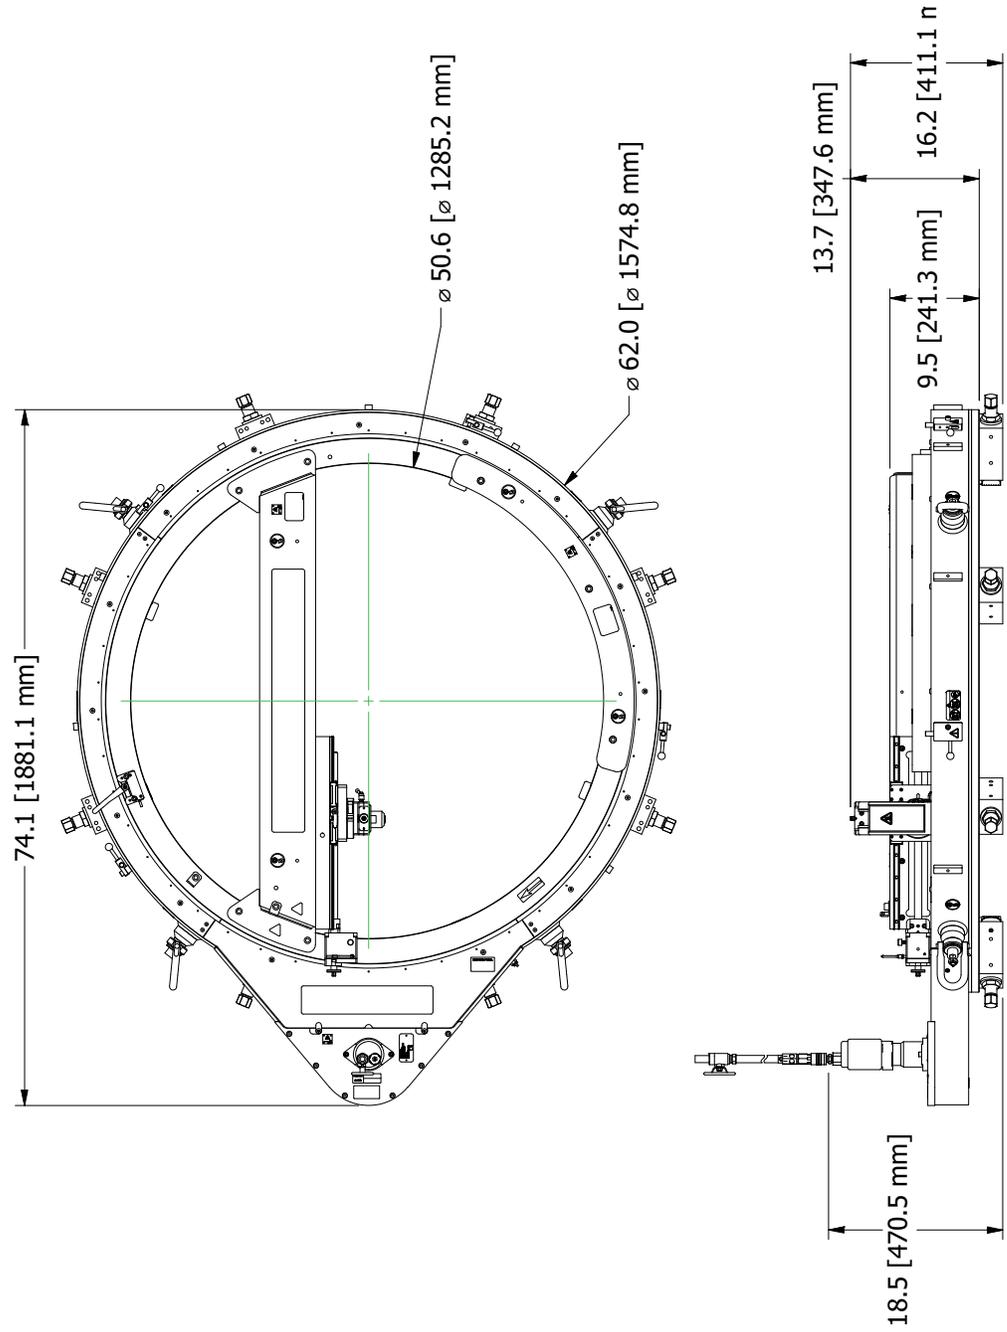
ODF50 SPEED FACER DIMENSIONS (P/N 86980)
